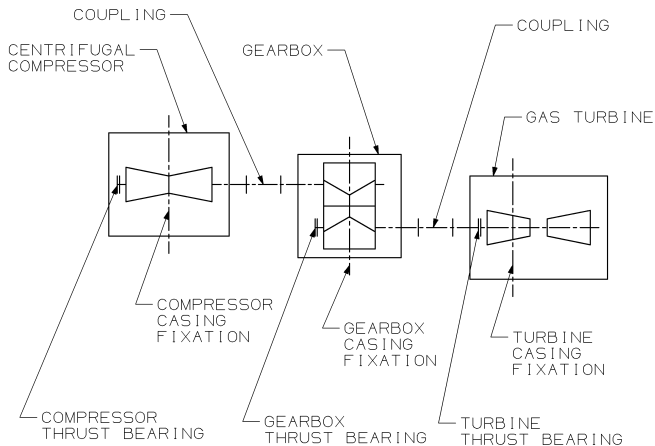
Layout of Gas Turbine, Gearbox, Centrifugal Compressor Train in Example 1.
